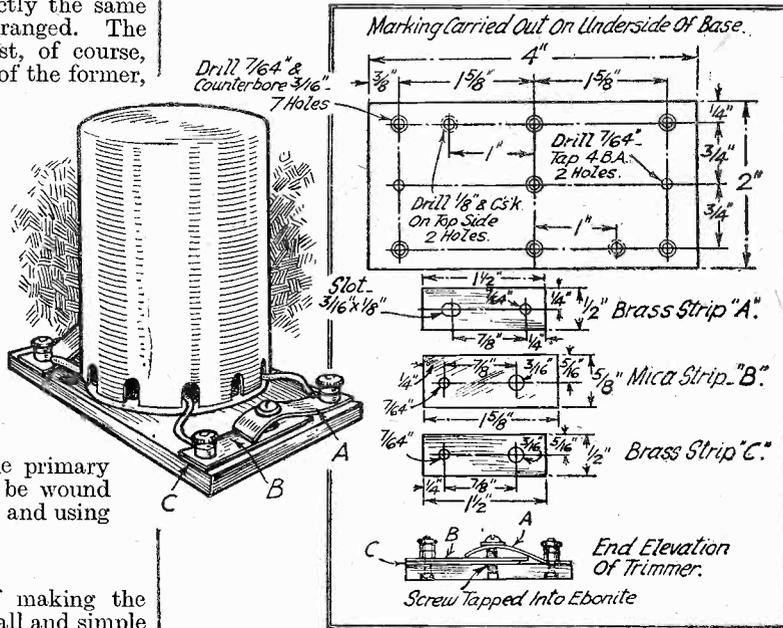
Full constructional details of the I.F. transformer and pre-set trimming condensers are given in this drawing.
